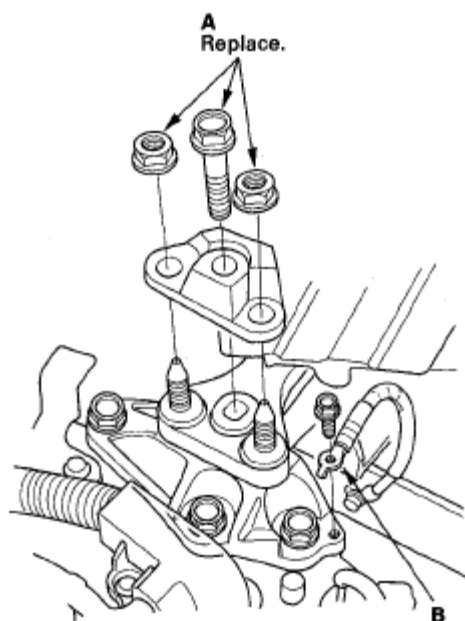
Identifying Transmission Mounting Bolt And Nuts
